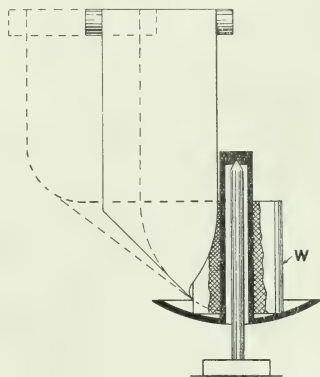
Web holder and platen arrangement for page-printing telegraph (Western Electric Co.).
